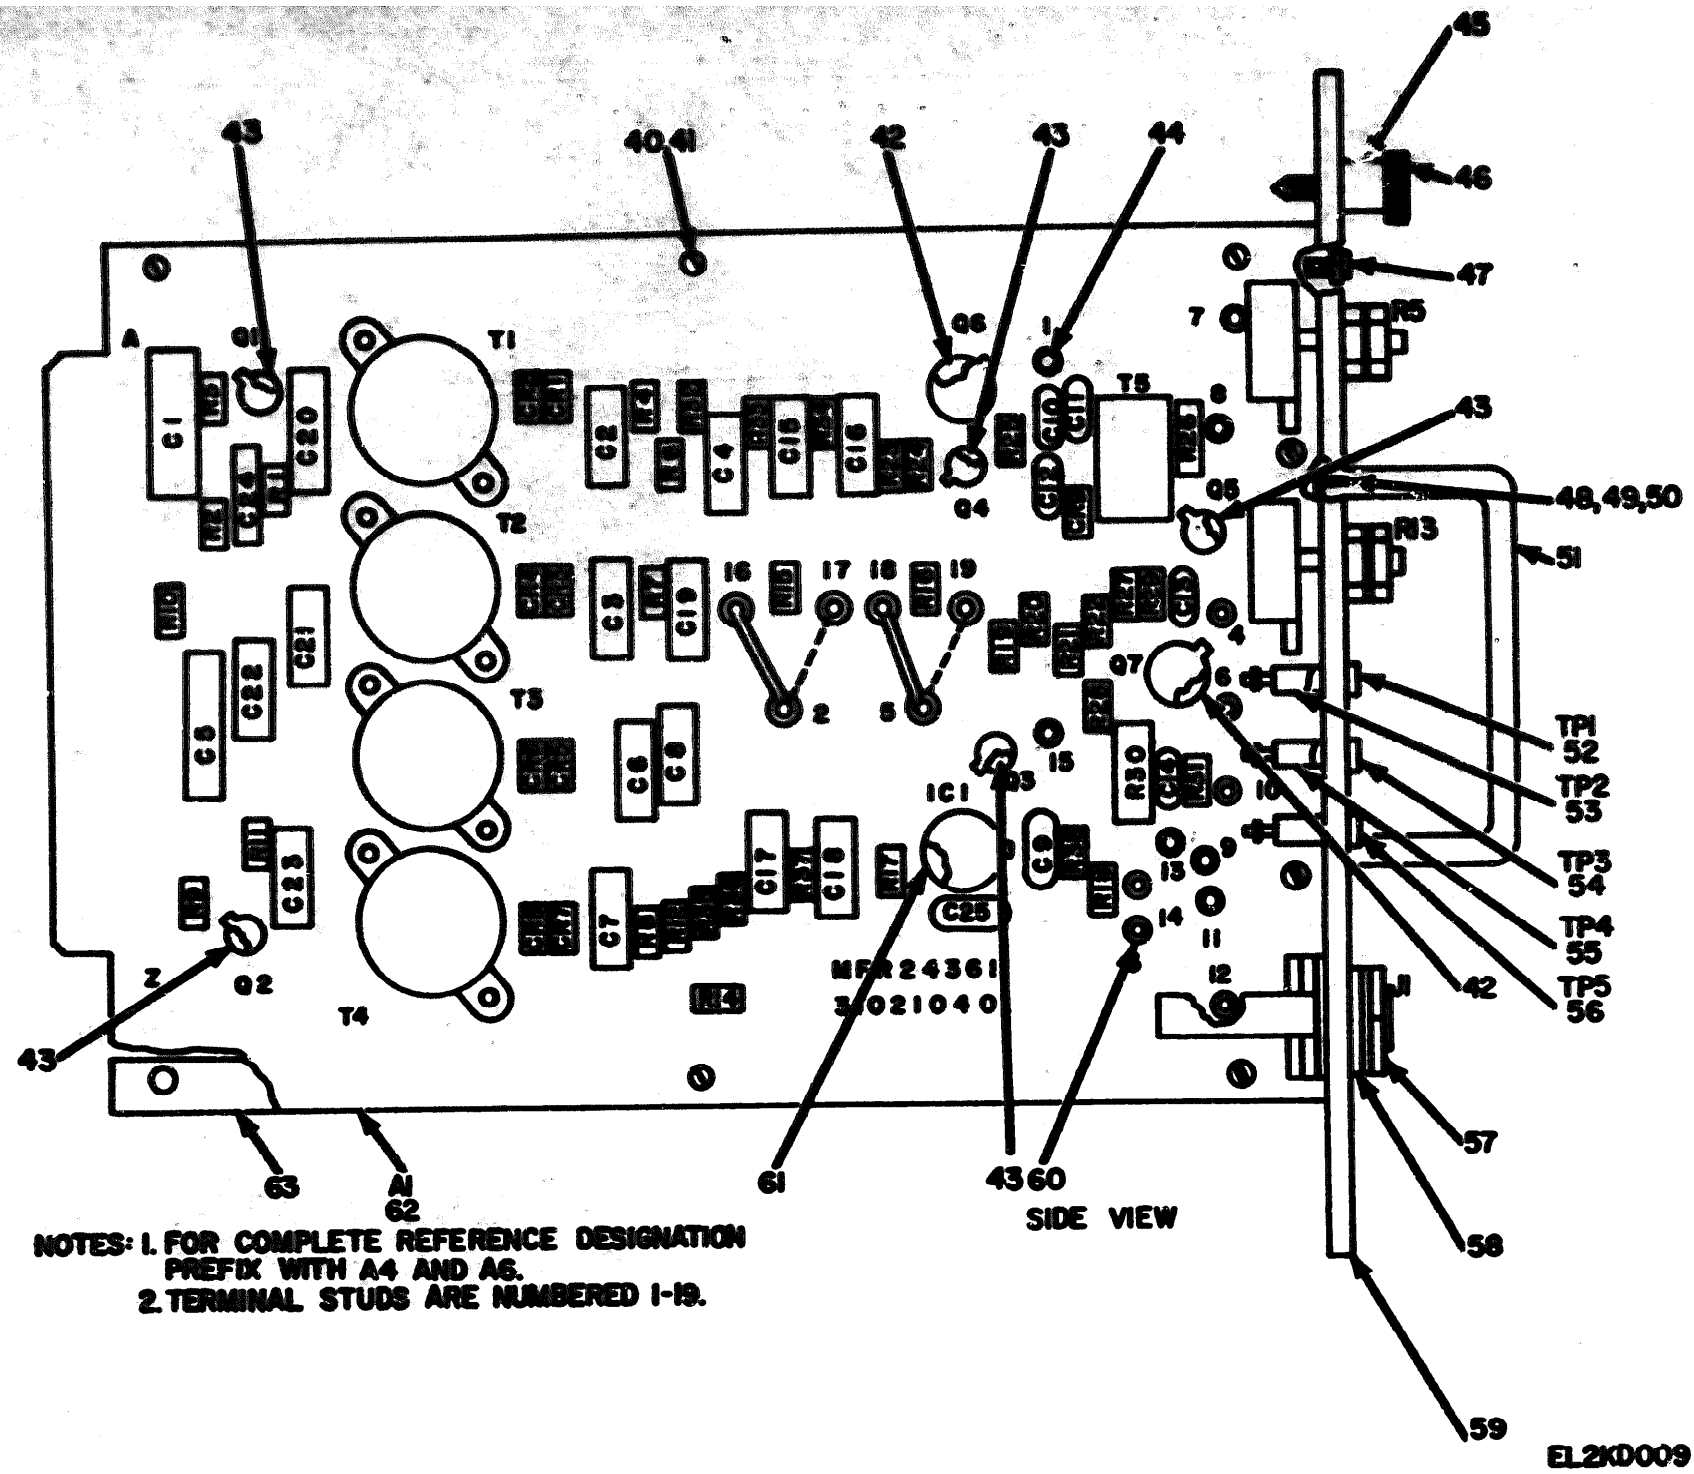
Combiner Assembly (A4) (Sheet 1 of 2)
